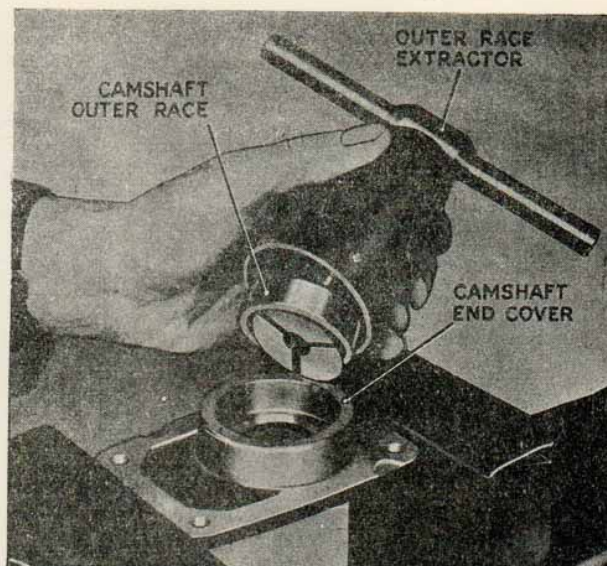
REMOVING CAMSHAFT BEARING OUTER RACE.
